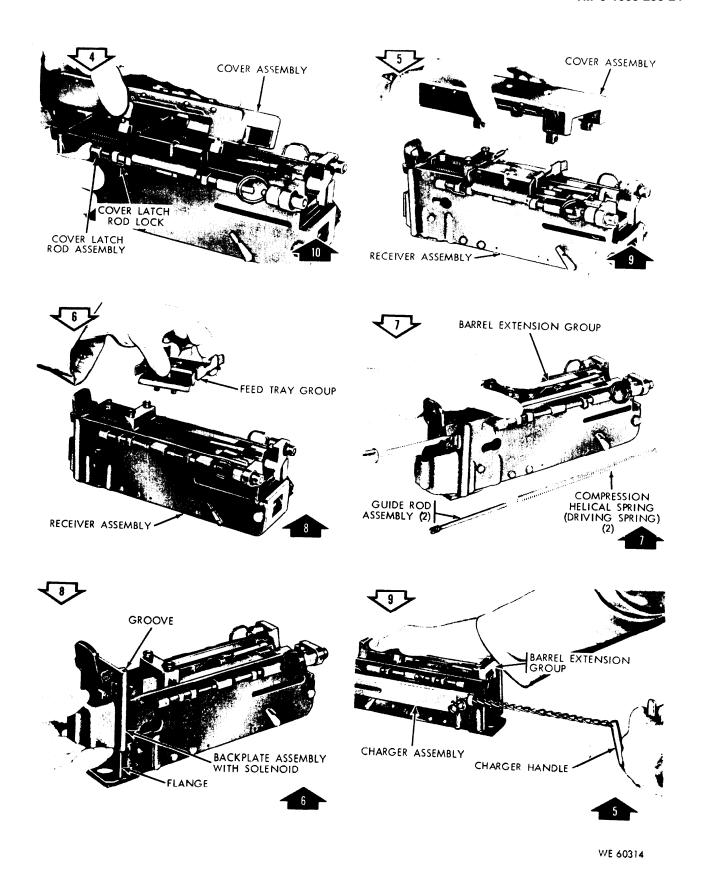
Disassembly / assembly of machine gun. (3 of 4)
